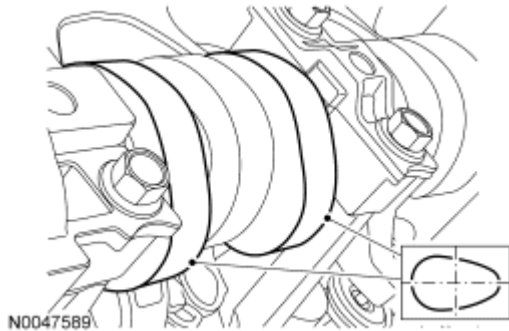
Checking Position Of No. 5 Cylinder Intake And Exhaust Camshaft Lobes
